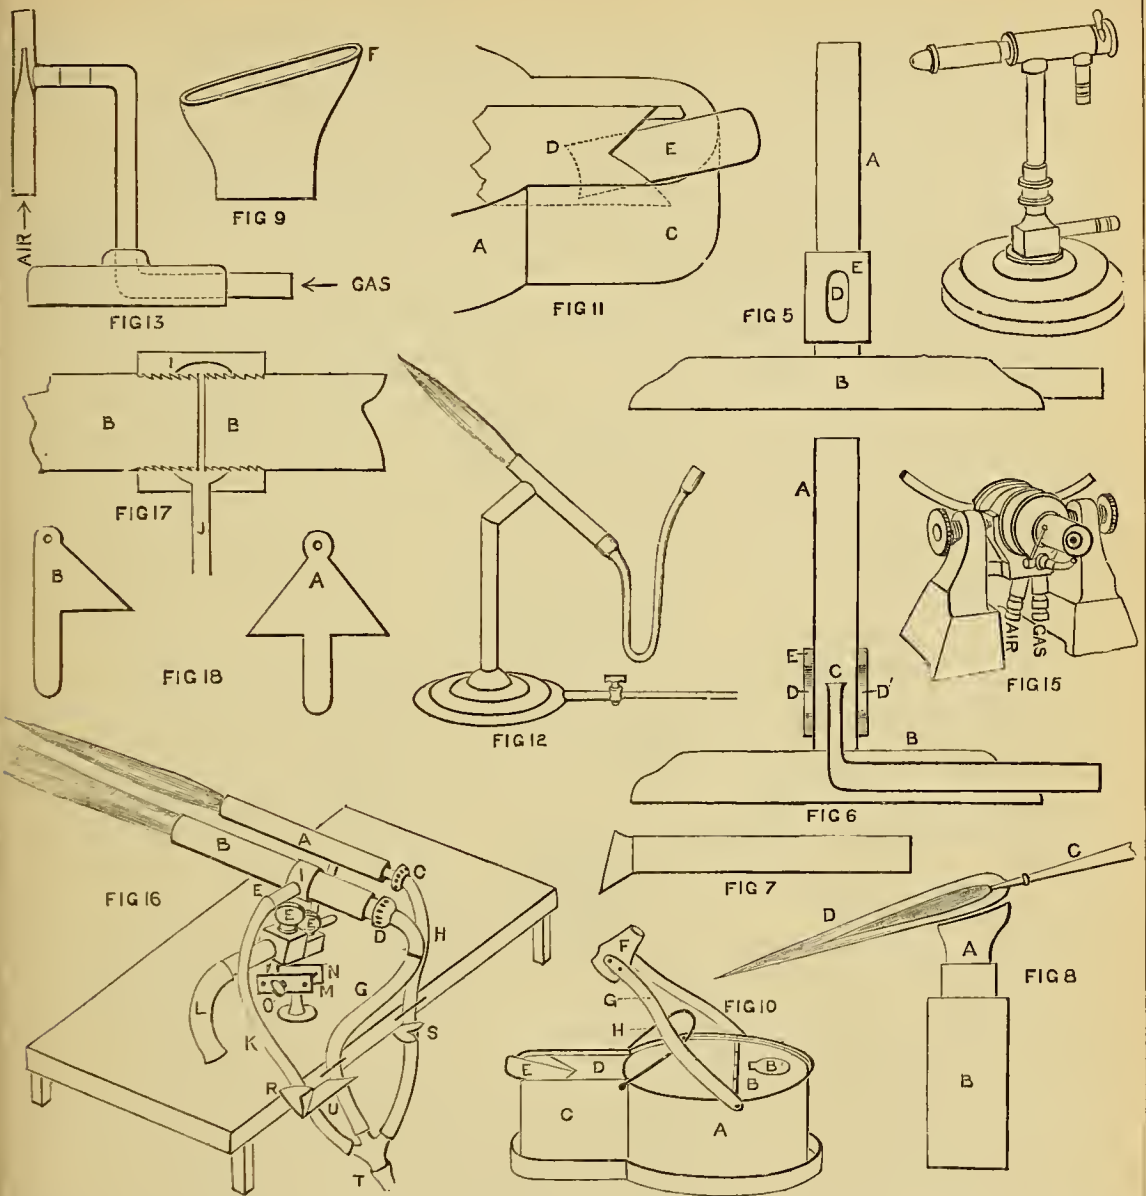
BUNSEN BURNER. FIG. 6.—SECTION OF BUNSEN BURNER—A, Upright Tube; B, Stand; C, Gas Jet; D, D', Air Openings; E, Air Regulator. FIG. 7.—BLOW-PIPE JET. FIG. 8.—BLOW-PIPE FLAME—A, Gas Jet; B, Bunsen Burner; C, Blow-pipe; D, Flame. FIG. 9.—ENLARGED VIEW OF UPPER PORTION OF BLOW-PIPE JET. FIG. 10.—GLASS BLOWER'S LAMP—A, Body; B, B', Hinged Coils; C, Wick Holder; D, Sliding Cover; E, Wick Trough; F, Cap; G, Support for Cap; H, Loop. FIG. 11.—ENLARGED VIEW OF WICK HOLDER OF GLASS BLOWER'S LAMP. FIG. 12.—HERAPATH BLOW-PIPE. FIG. 13.—SECTION OF HERAPATH BLOW-PIPE. FIG. 14.—FLETCHER'S AUTOMATON BLOW-PIPE. FIG. 15.—FLETCHER'S COMPOUND BLOW-PIPE. FIG. 16.—GRONINGHAM'S PATENT BLOW-PIPE—A and B, Blow-pipes; C and D, Sliding Tubes for Blast; E and F, Lever Taps; G, H, and K, Indiarubber Air Tubes; I and J, Hollow Clamp connected with Air Supply [See Fig. 17]; L, Indiarubber Gas Tube; M and N, Checks of Wooden Clamp; O, Thumbscrew; R, S, and U, Kinking Levers; T, Three-way Air Distributor. FIG. 17.—ENLARGED VIEW OF A PORTION OF GRONINGHAM'S BLOW-PIPE [See I and J, Fig. 16]. FIG. 18.—ENLARGED VIEW OF KINKING LEVER FOR GRONINGHAM'S BLOW-PIPE.
